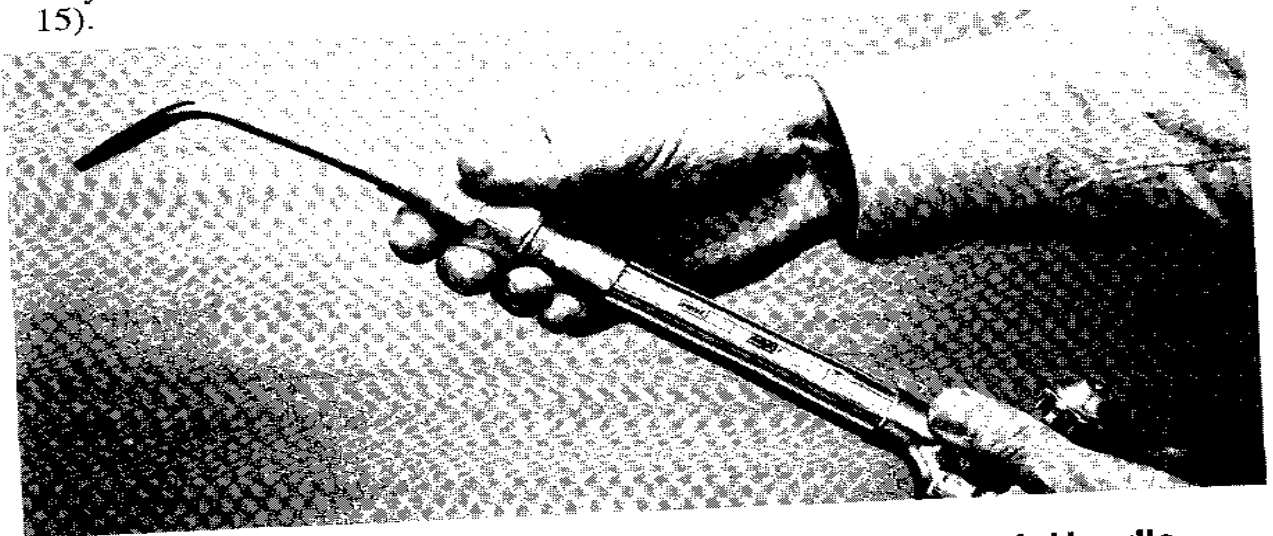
, Connecting the Welding Nozzle to Torch Handle
